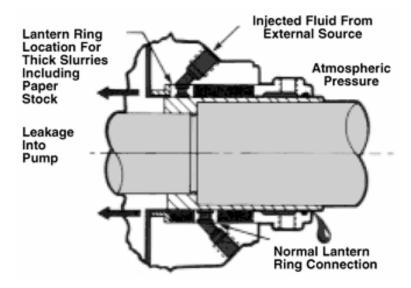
Typical Stuffing Box Arrangement when Pumping Slurries
